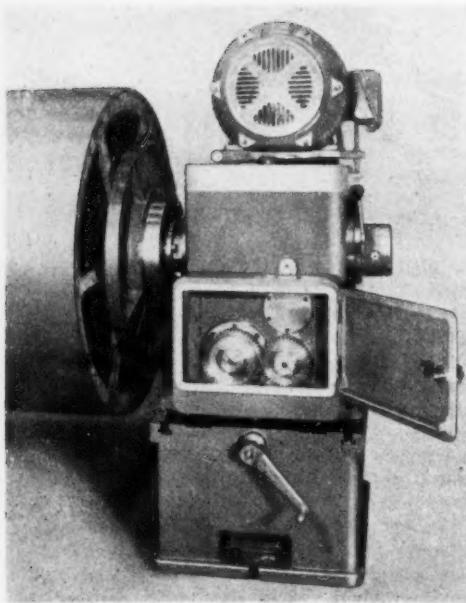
Close-up View from the Rear of the Headstock on the Lathe Shown in Fig. 1
